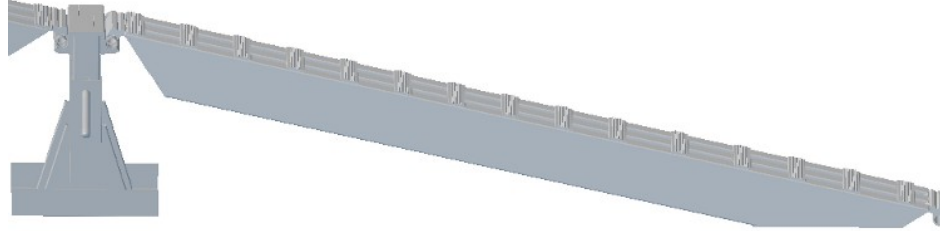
Side View of 8' Lower Ramp Section, in place between ramp stand and ground
